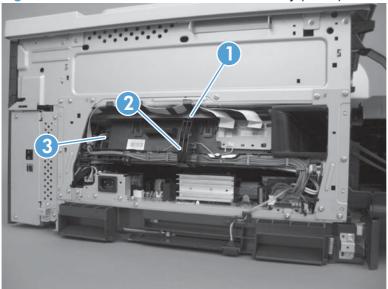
Remove the laser/scanner assembly (1 of 4)
